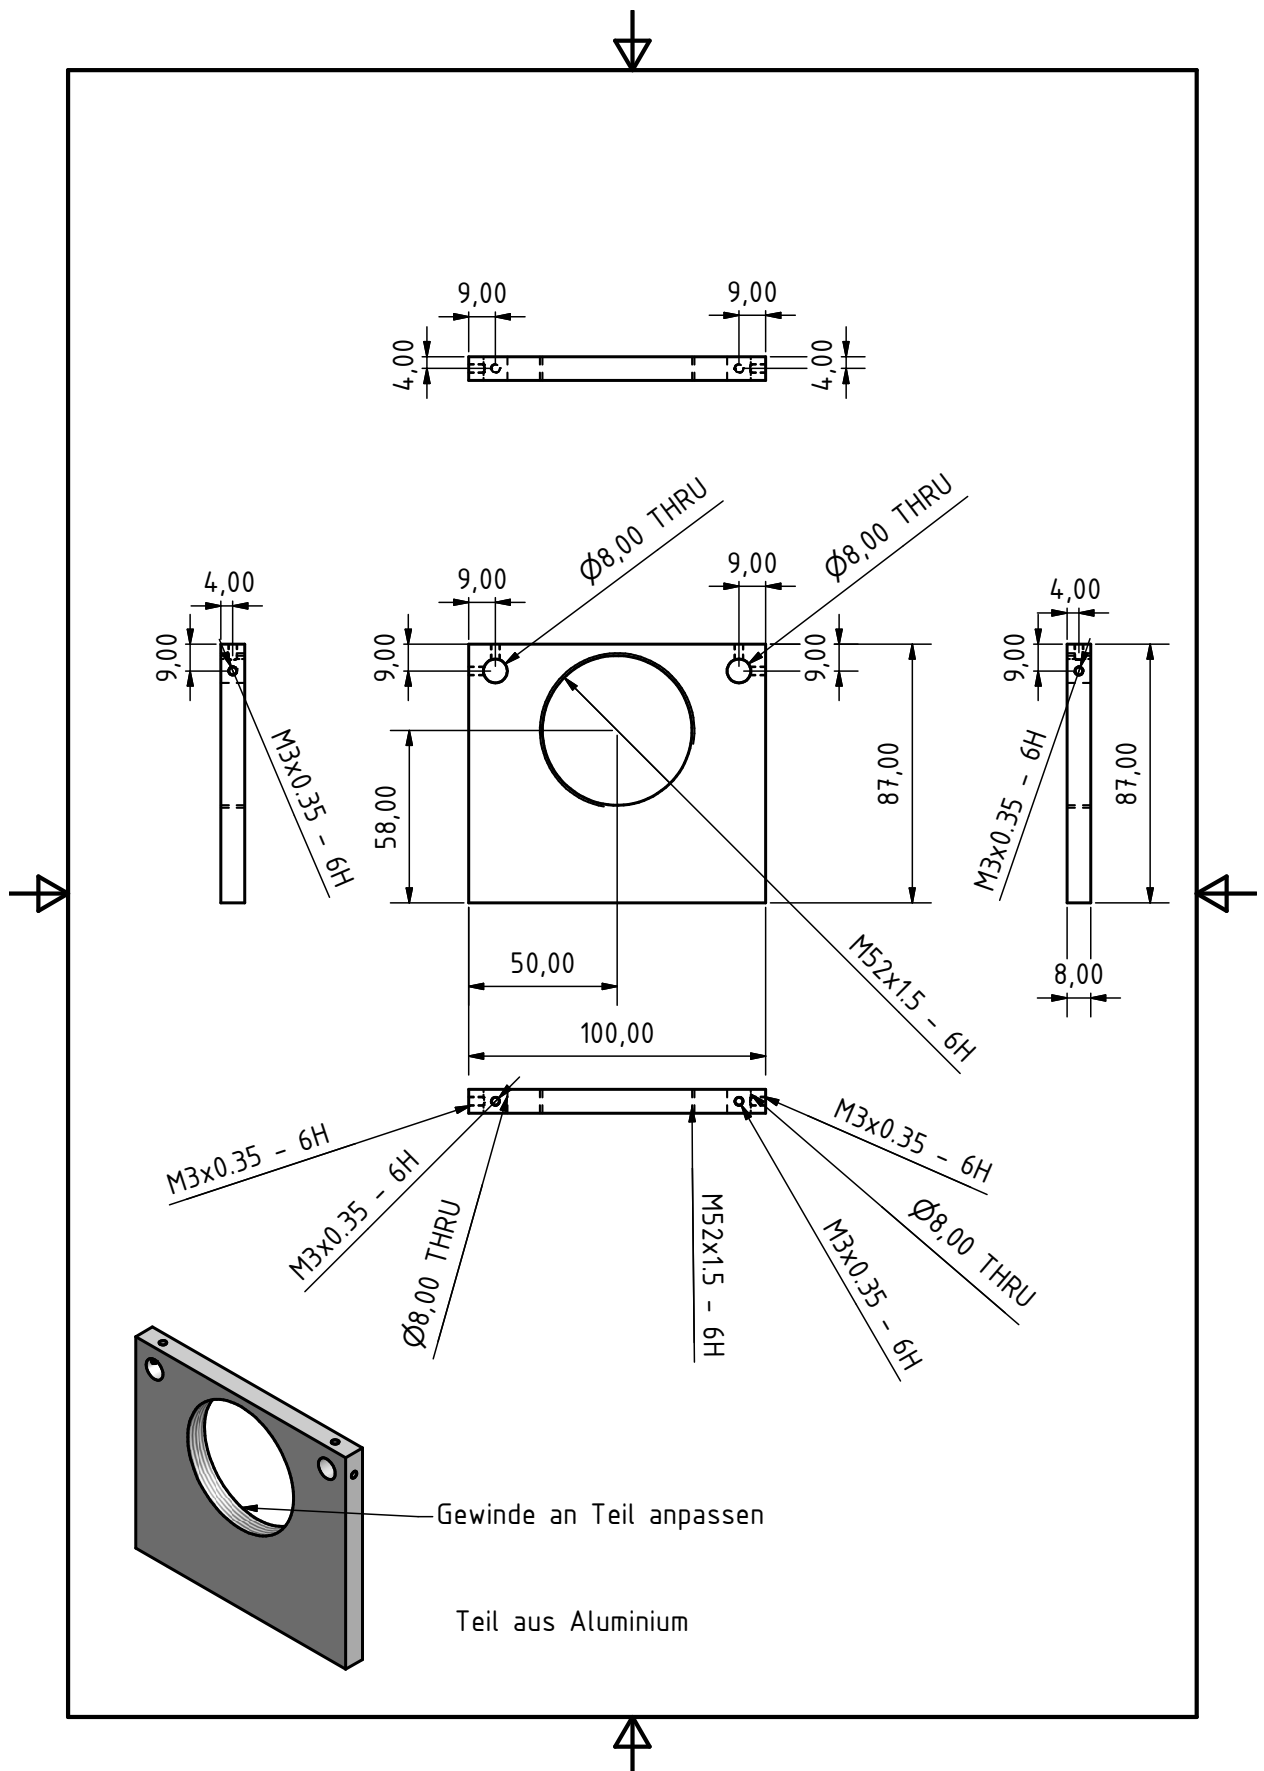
CAD sketch of detector slot with female thread fitting to holder of convex lens.
